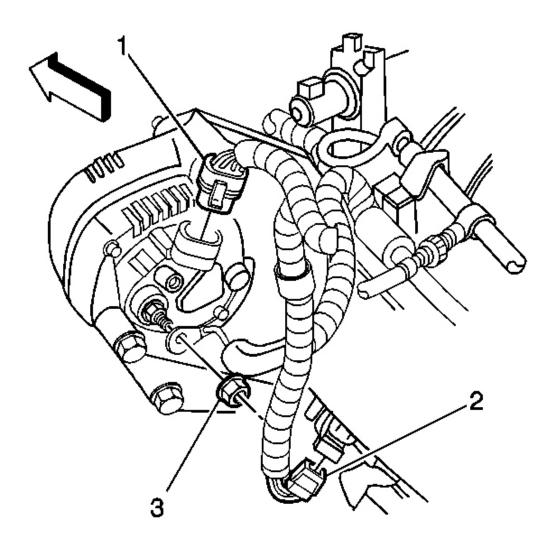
Engine Wiring Harness Generator Lead Nut & Generator Electrical Connector
